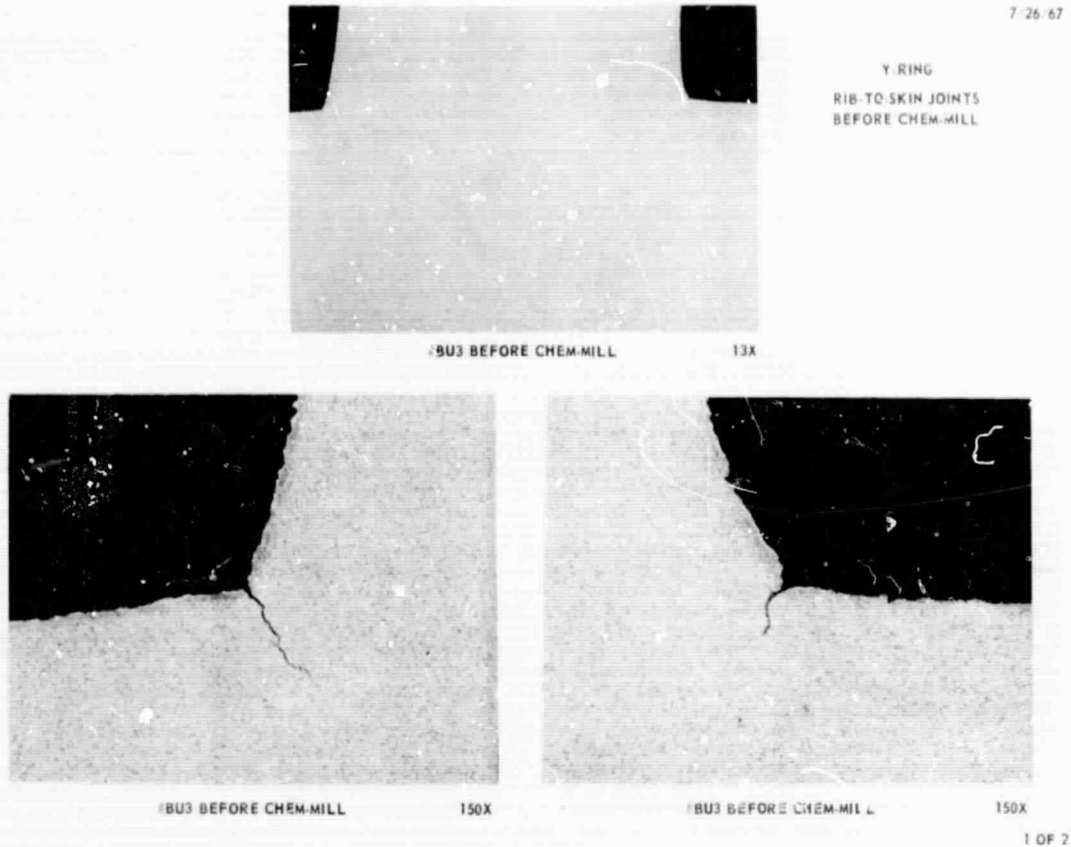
Y-RING RIB-TO-SKIN ROLL DIFFUSION JOINTS BEFORE CHEM-MILLING
